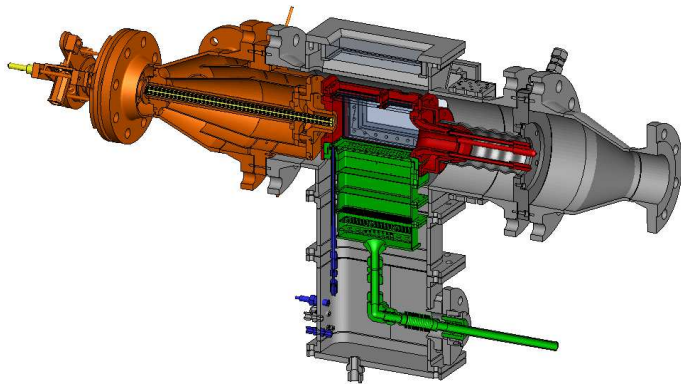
Main components of the SSGT test rig. Grey, pressure vessel; red, flame tube; orange, movable block radial swirler; blue, ignition torch; green, effusion cooling liner.
